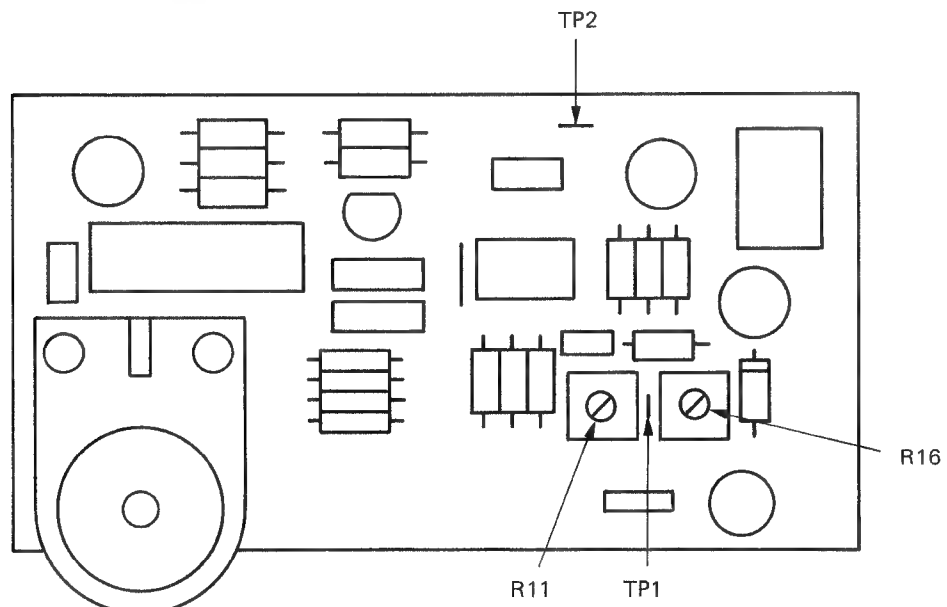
Tape tension sensor PCB 1.727.320
